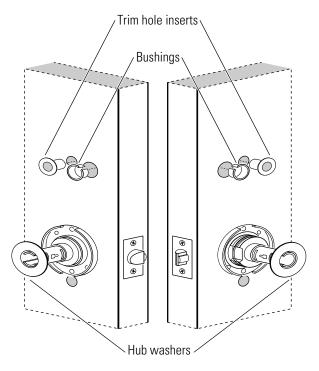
Removing the bushings, trim hole inserts, and hub washers (B.A.S.I.S. Lock shown)
